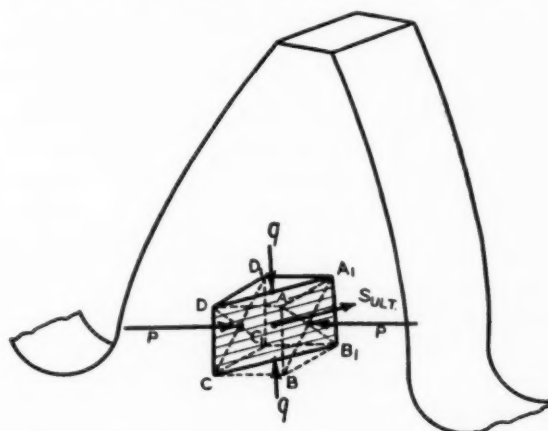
GEAR TOOTH SHOWING DIRECTION OF $S_{ult} = p/2$
